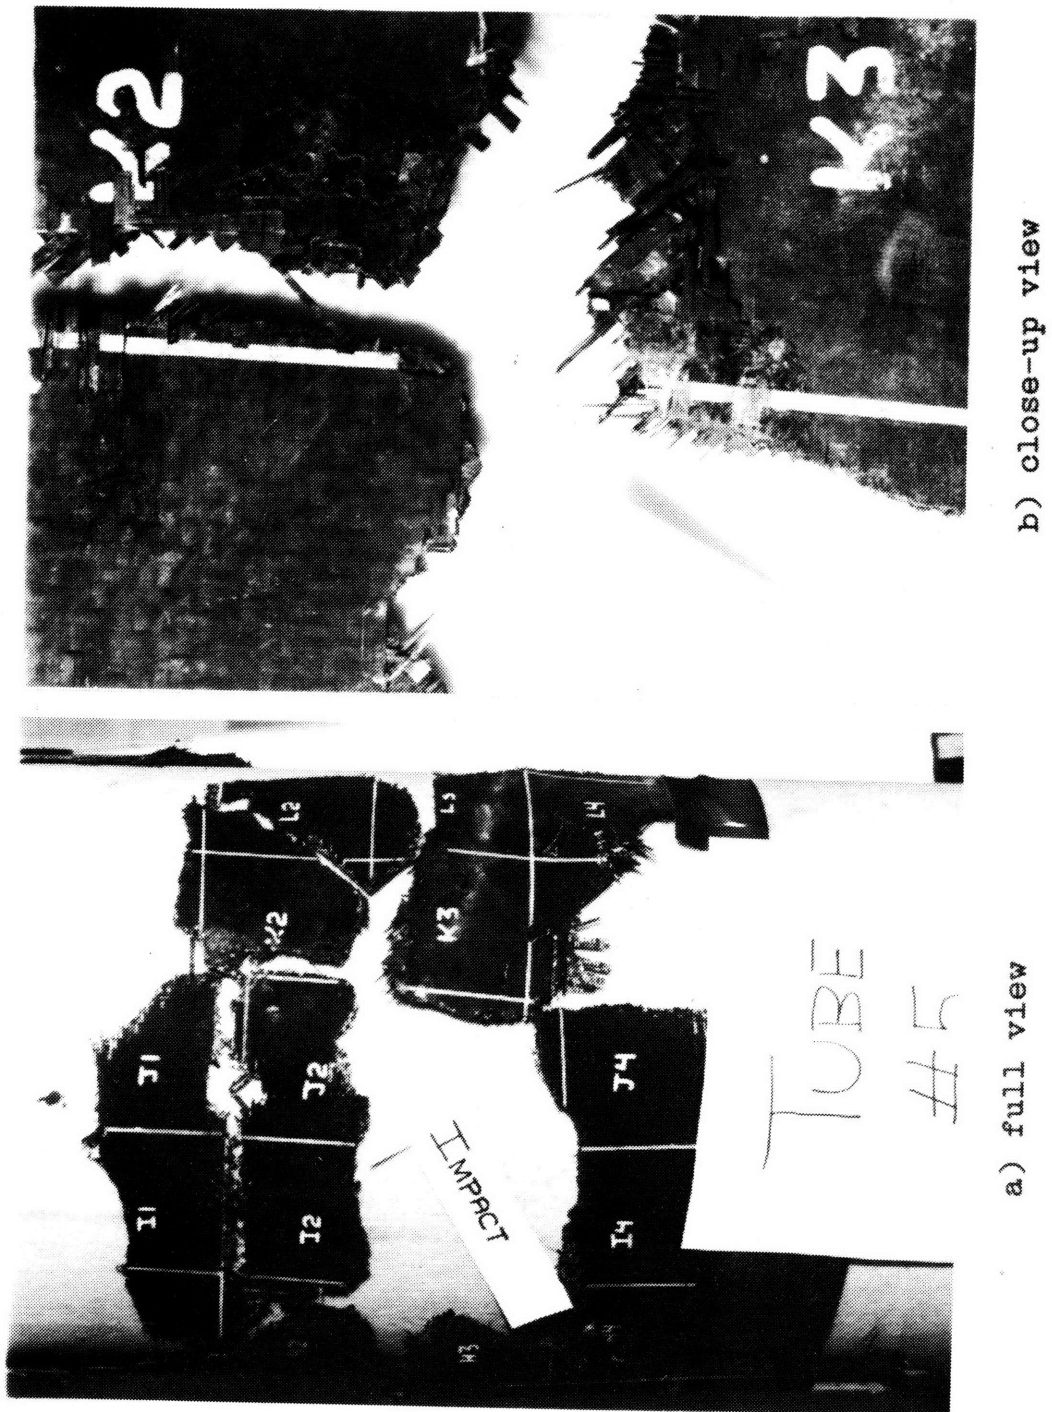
Photograph of Reconstructed Tube 5 with Punch-through Damage - a) Full View and b) Close-up View
